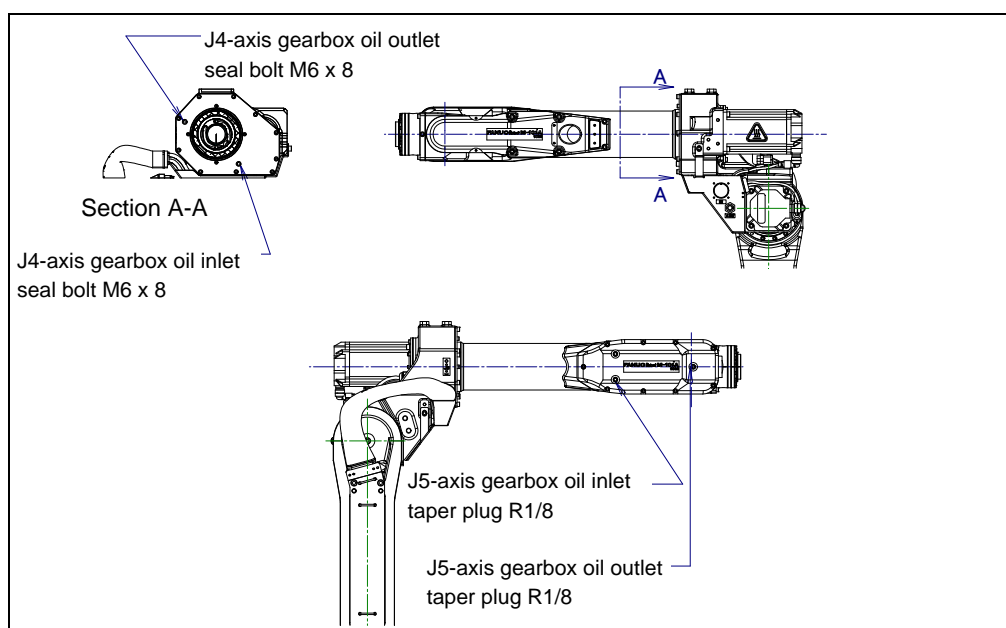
Greasing point of J4/J5-axis gearbox
